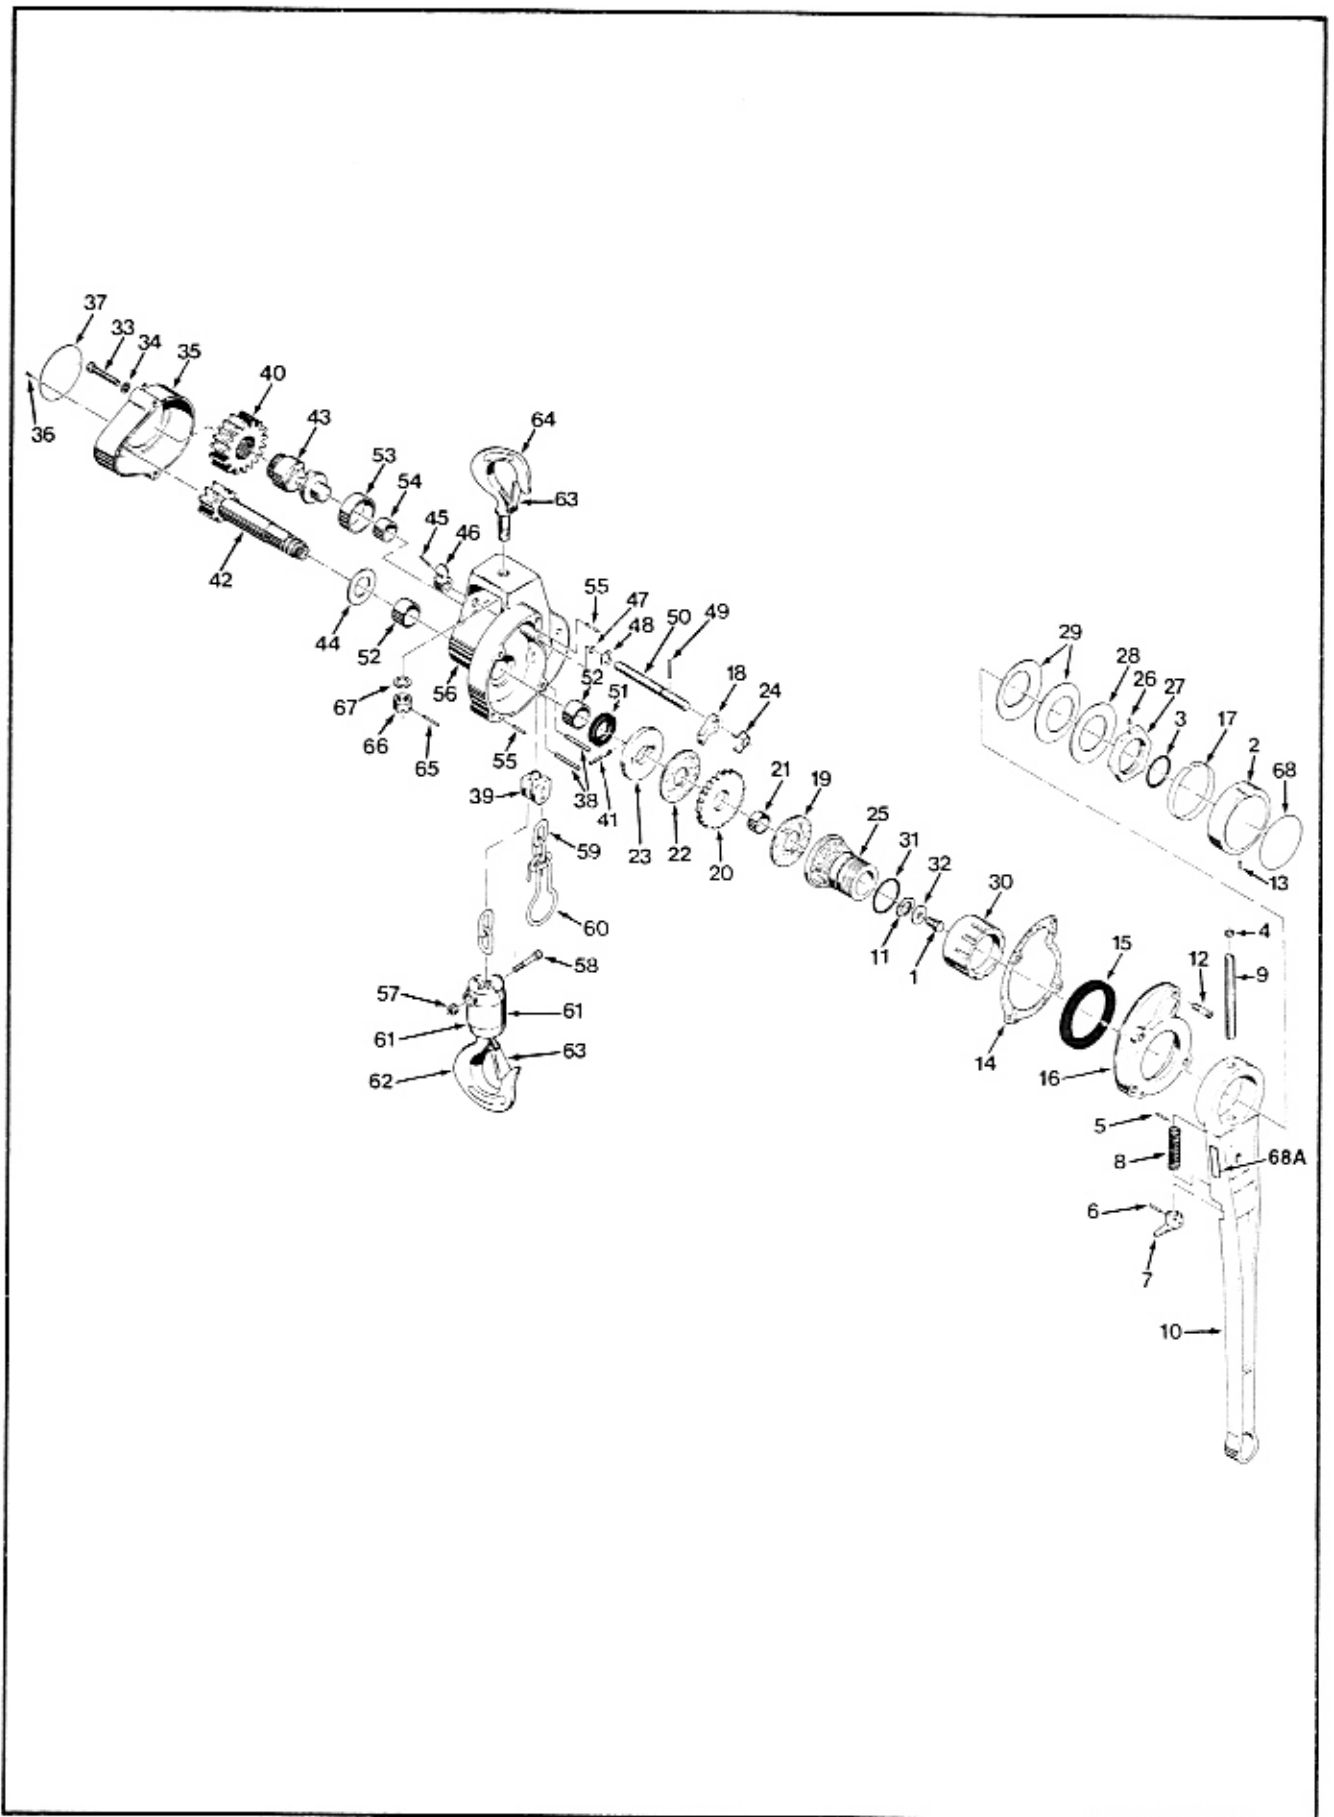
EXPLODED ILLUSTRATION OF MODEL MAL-30 HOIST
